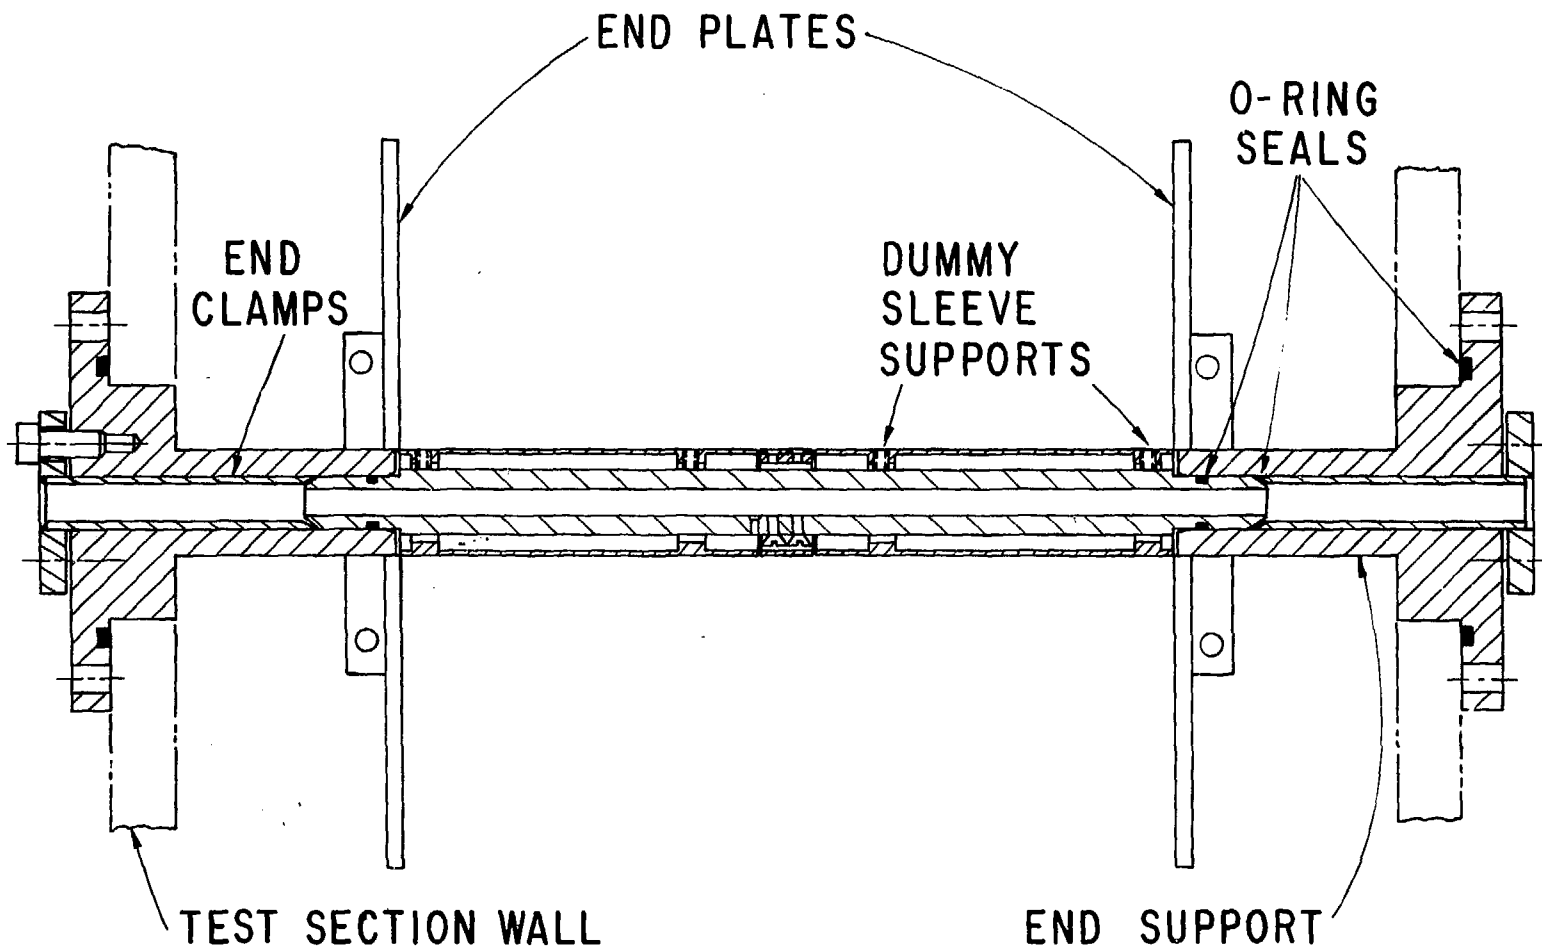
Force-transducer assembly mounted in end supports attached to test-section walls
